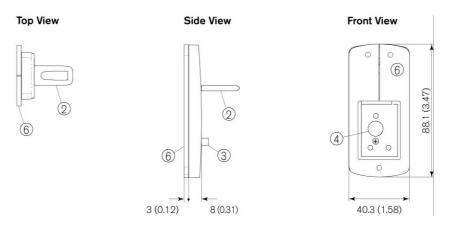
Dimensions of the GAT NET.Lock BoltSet 7200 (dimensions in mm – inches in brackets)
